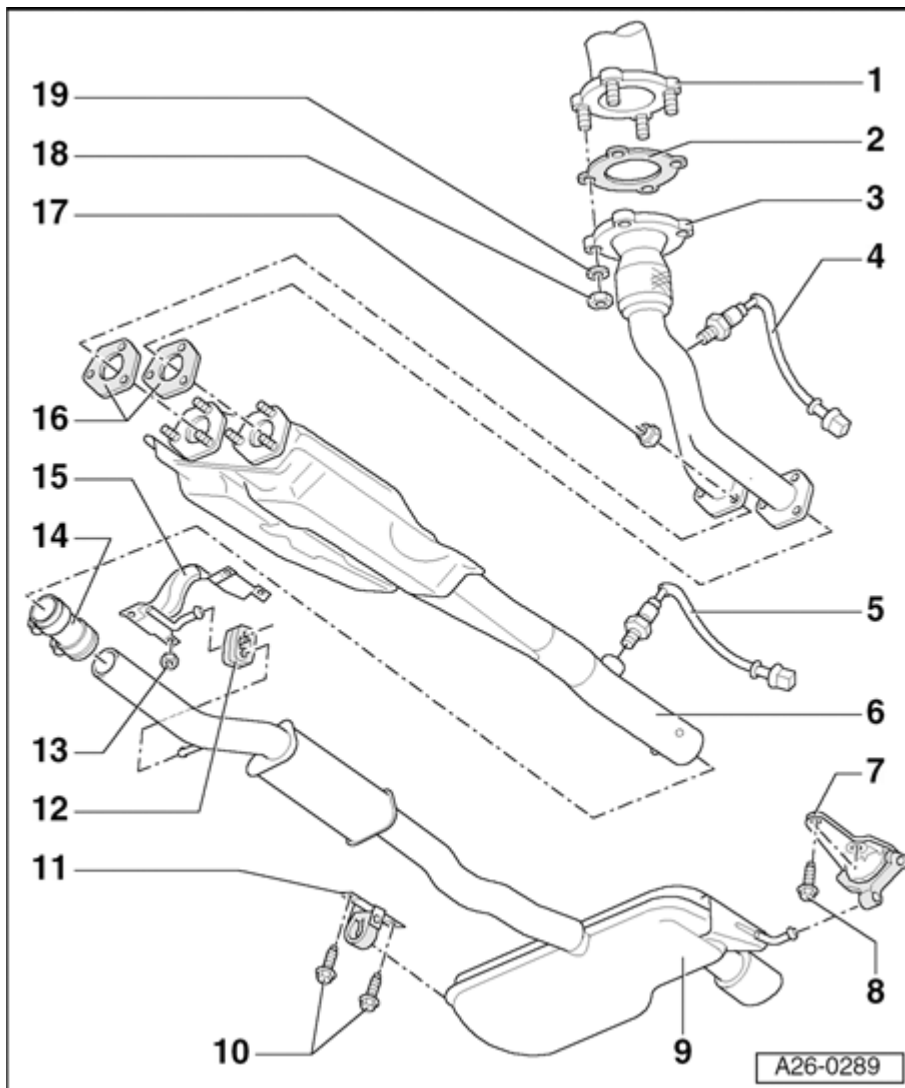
Exploded View Of Exhaust System, Vehicles With All Wheel Drive
